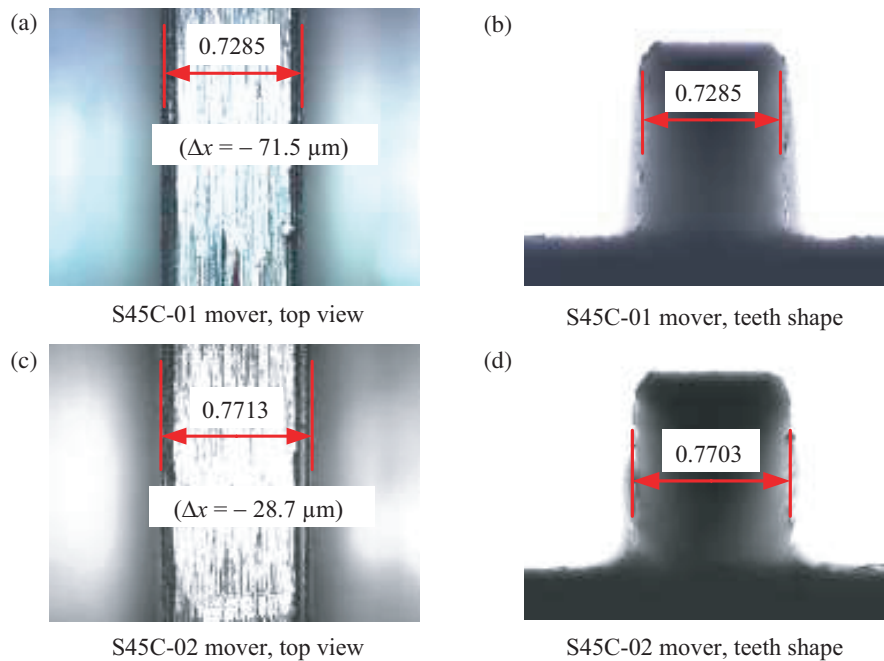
Sample of top view and teeth shape of the SRLSM's shaft mover.
